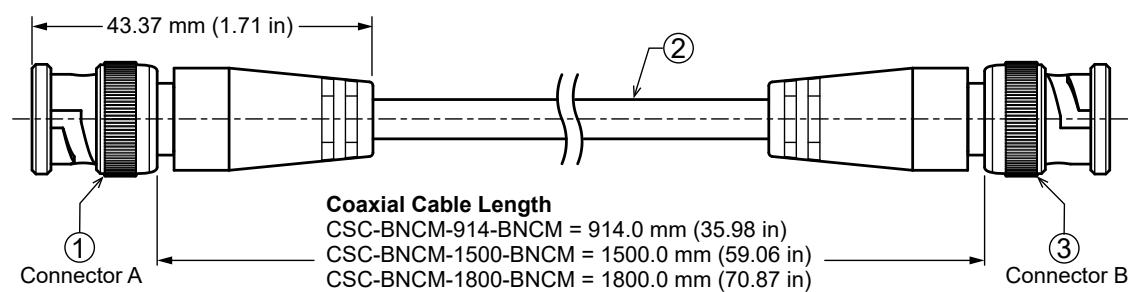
Product Dimensions for the CSC-BNCM-ccc-BNCM Cable Assembly
